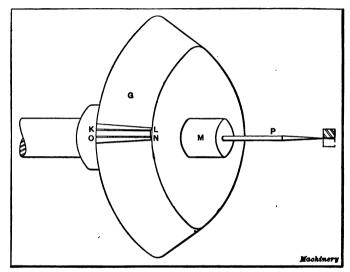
Method of setting Gear Cutter for taking Second Cut
